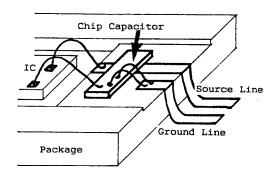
Assembly Of A By-Pass Capacitor In A Package
